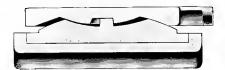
Section Through A. B. C. Journal Bearing and Wedge. A. B. C. Bearing Corporation.
